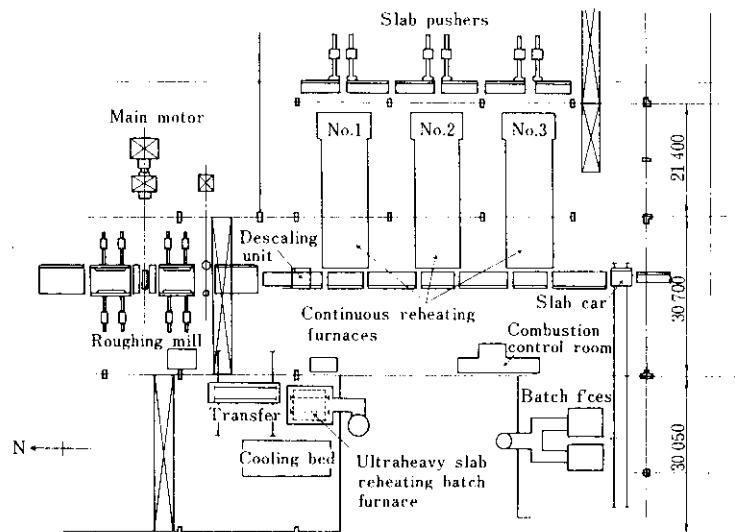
Layout of plate mill confined to ultraheavy steel plate rolling
